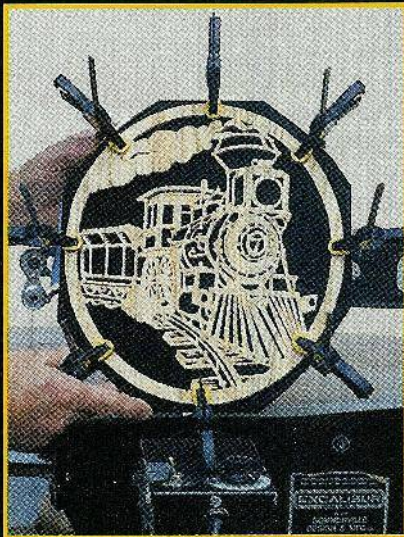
Affix the velvet board to the back of the pattern piece and clamp it in place.
